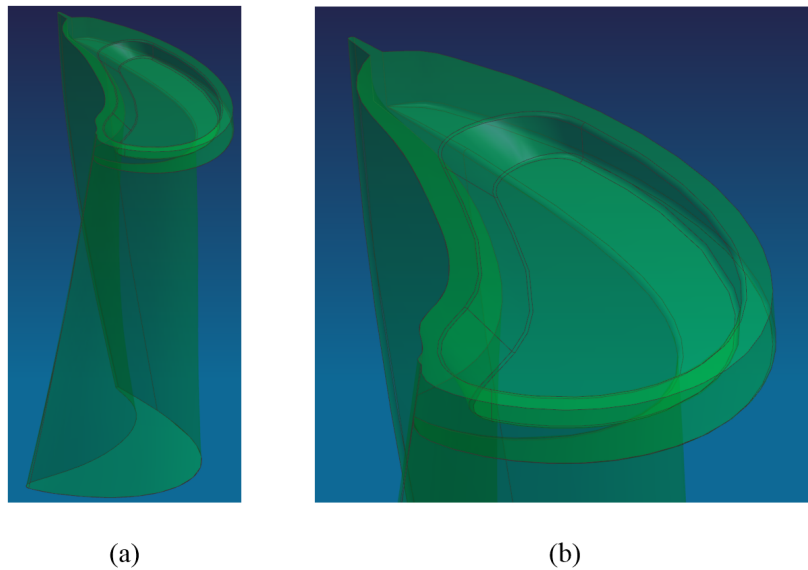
3D parametric CAD model in Siemens NX: a) Rotor blade geometry and b) winglet.
